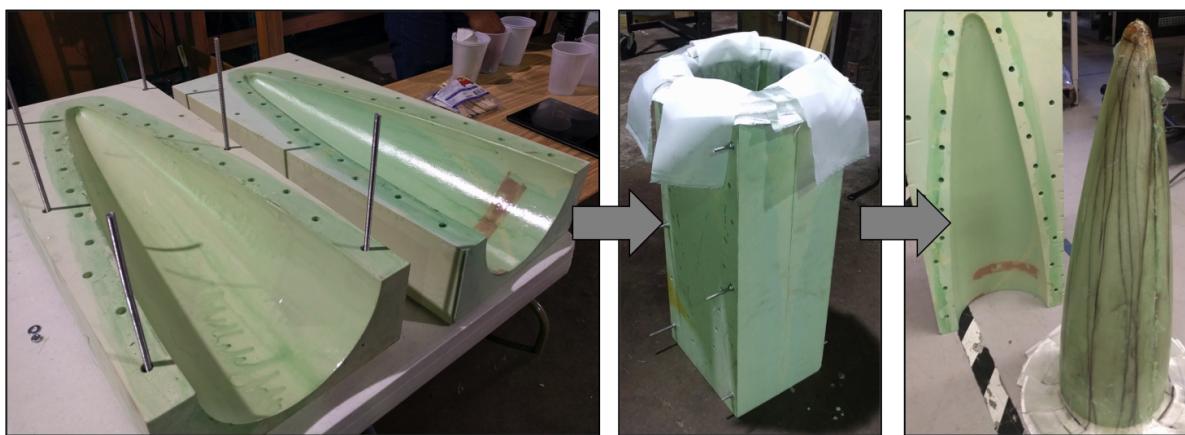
Nose cone manufacturing process, HDF mold - wet layup inside negative mold - mold release
